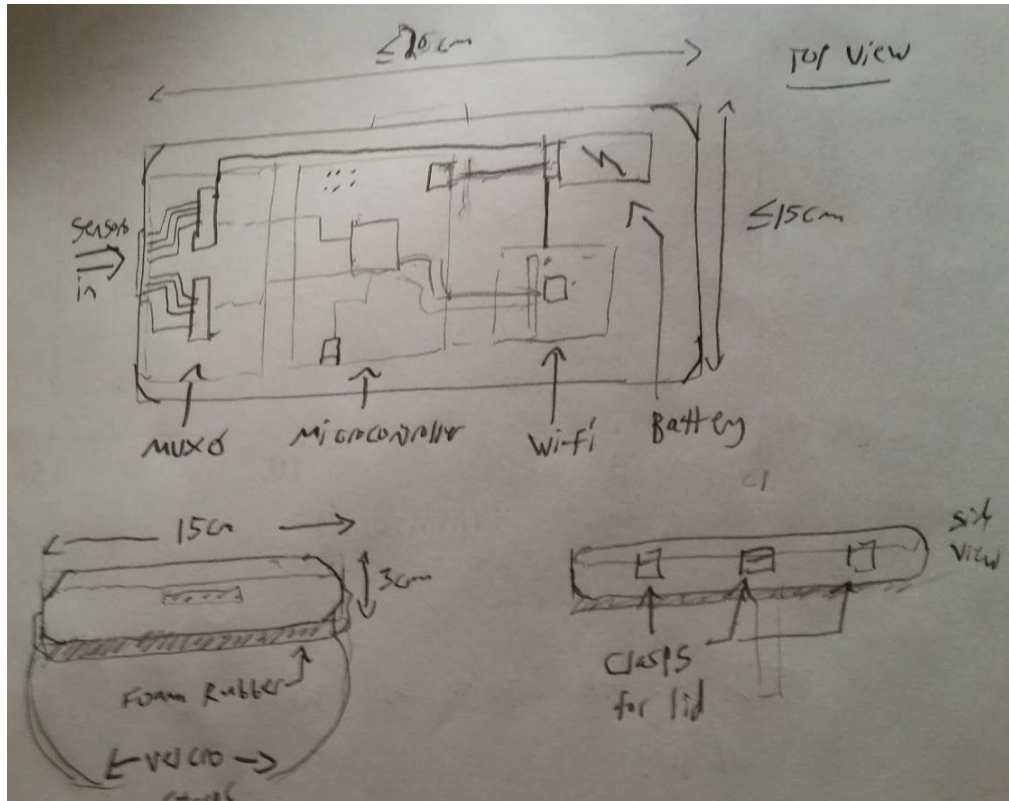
Sketch of circuit protector assembly: Top, front and side views.
